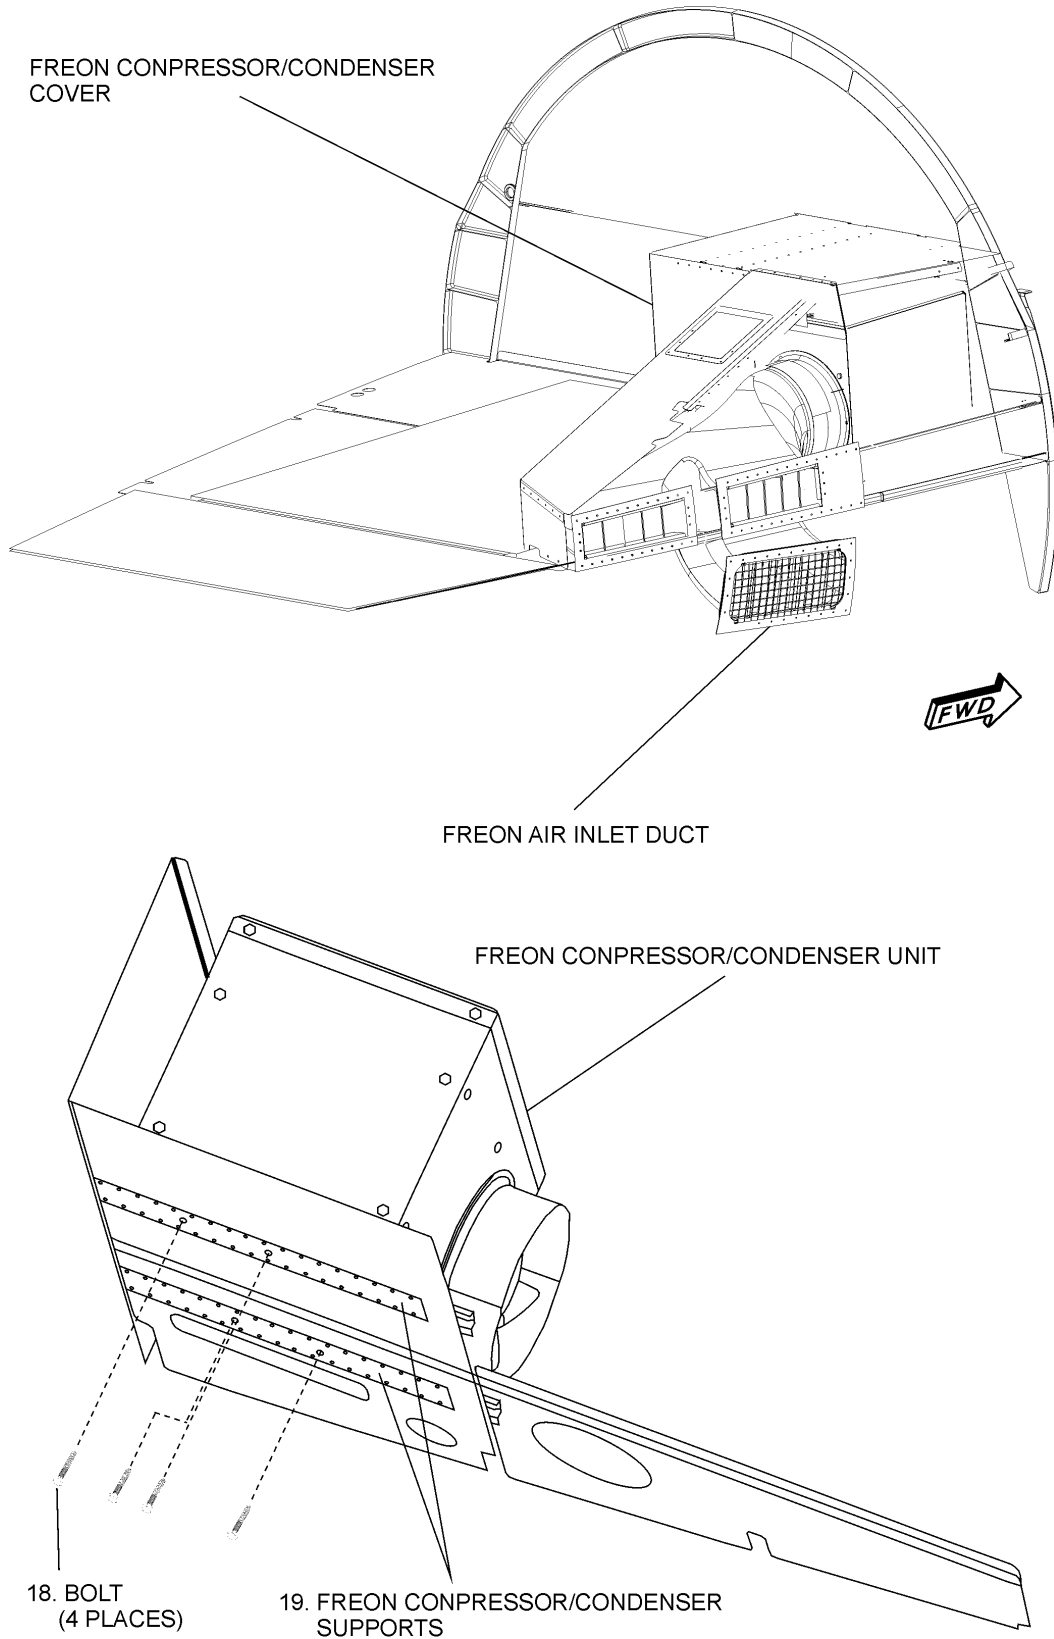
Compressor/Condenser - Removal/Installation (Sheet 6 of 6)
